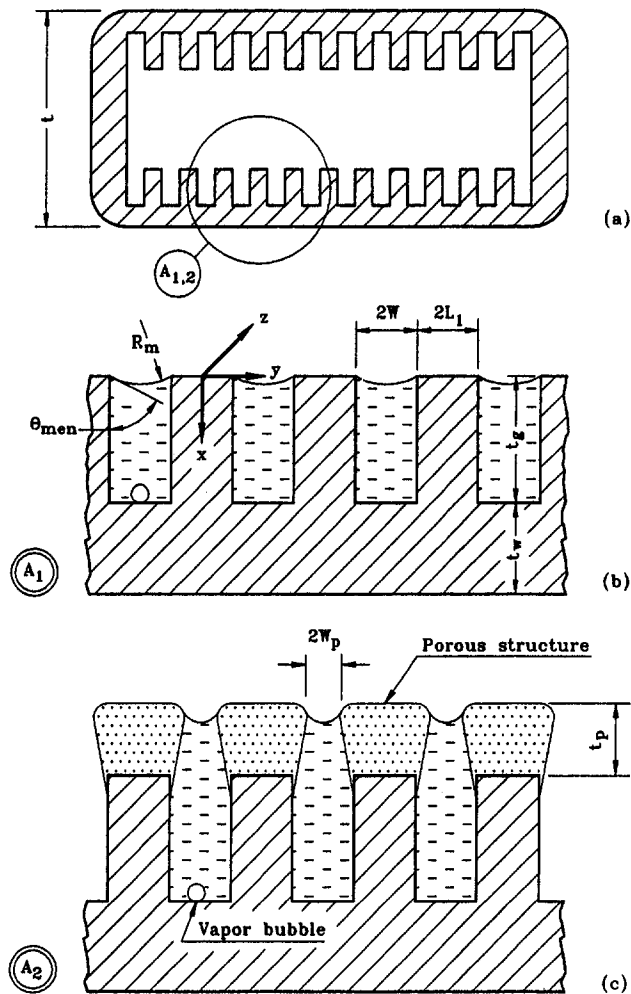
Flat miniature axially grooved heat pipe cross sections
